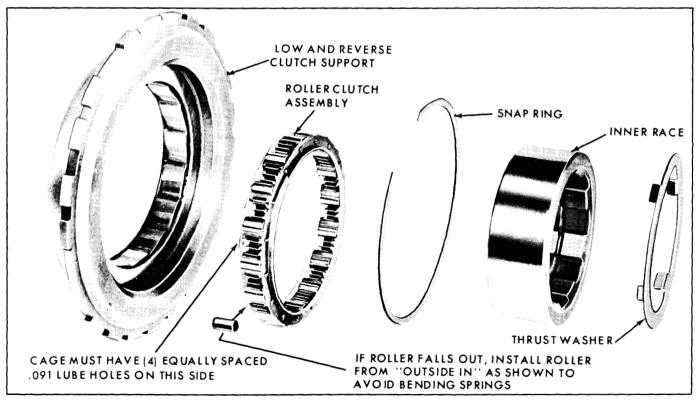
Low and Reverse Clutch Assembly - Exploded View
